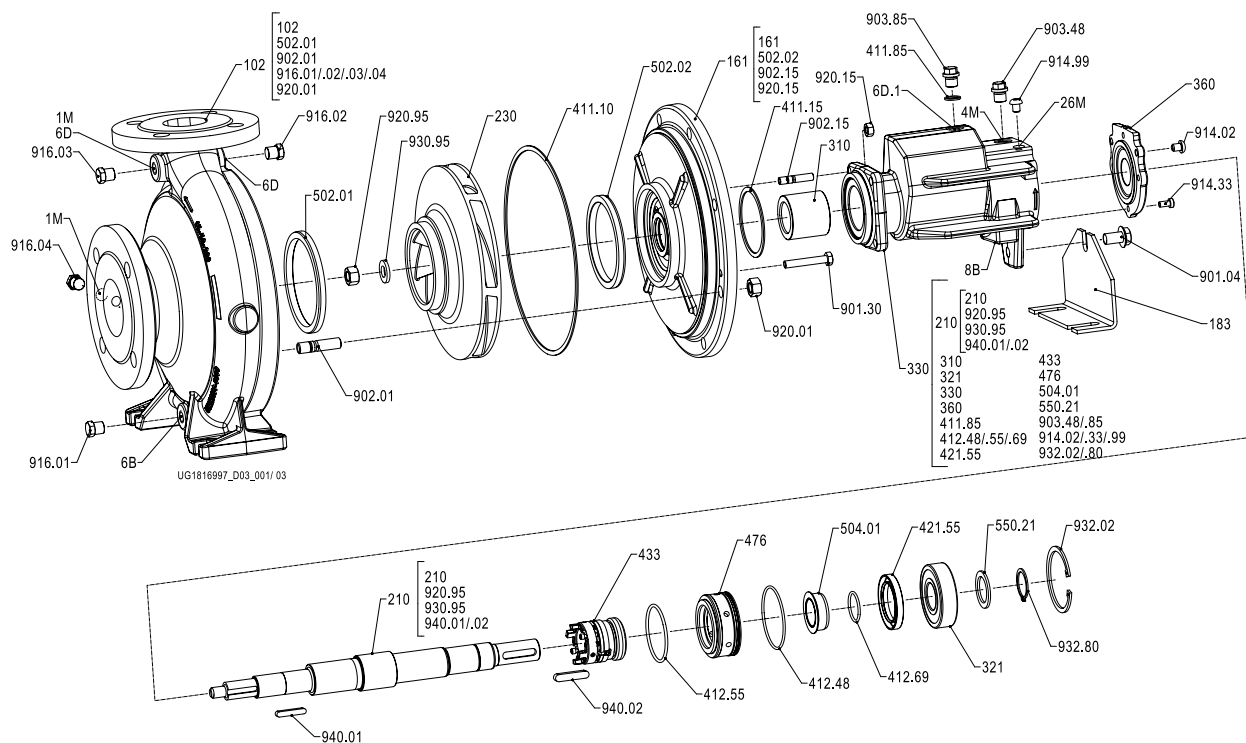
Exploded view of an Etanorm SYT, bearing bracket WS_25_LS (special design)
